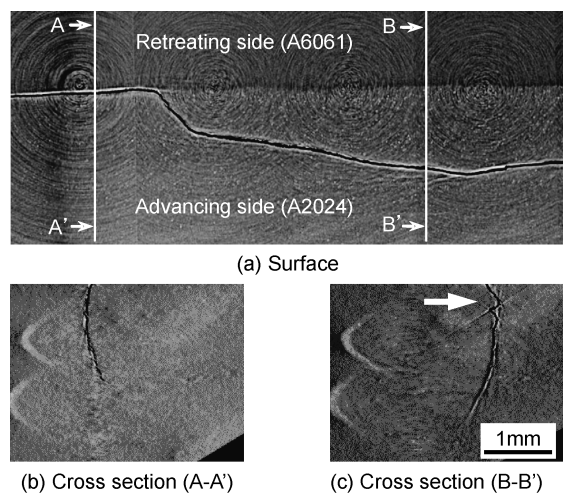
Fatigue crack inside the FSW dissimilar joint between A6061 and A2024.
